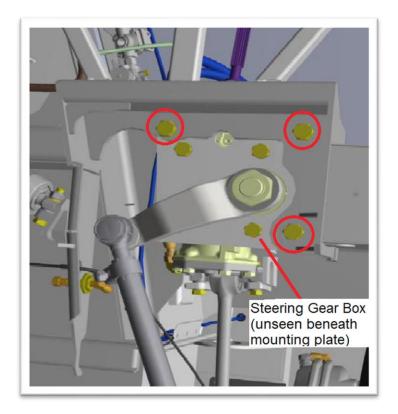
Bolts that secure the steering gearbox mounting plate assembly to the vehicle frame are circled in red. (Image Source: Nova Bus)
